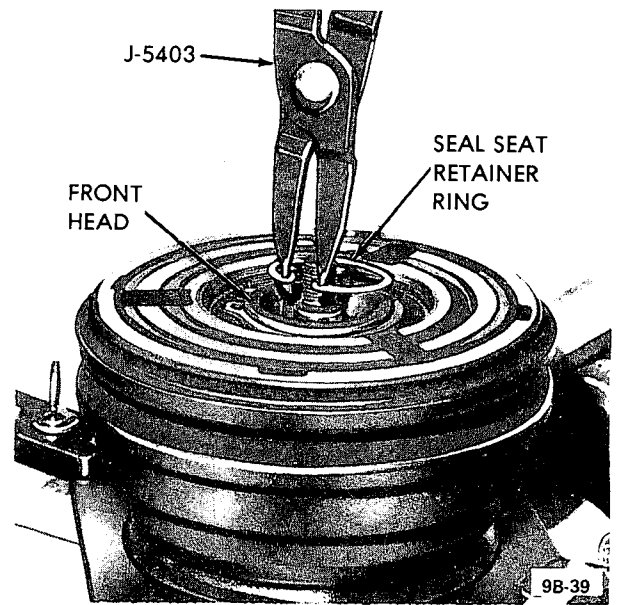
B-62 Removing or Installing Shaft Seal Seat Retaining Ring - 6 Cylinder Compressor
